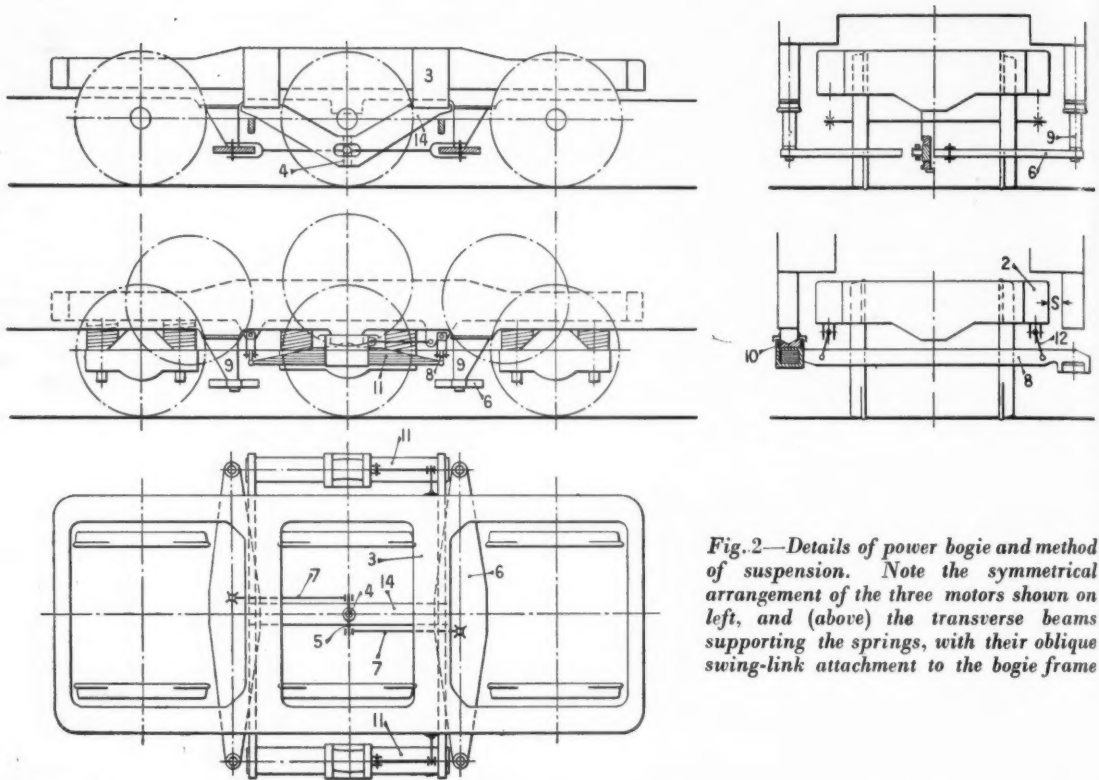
Details of power bogie and method of suspension. Note the symmetrical arrangement of the three motors shown on left, and (above) the transverse beams supporting the springs, with their oblique swing-link attachment to the bogie frame
